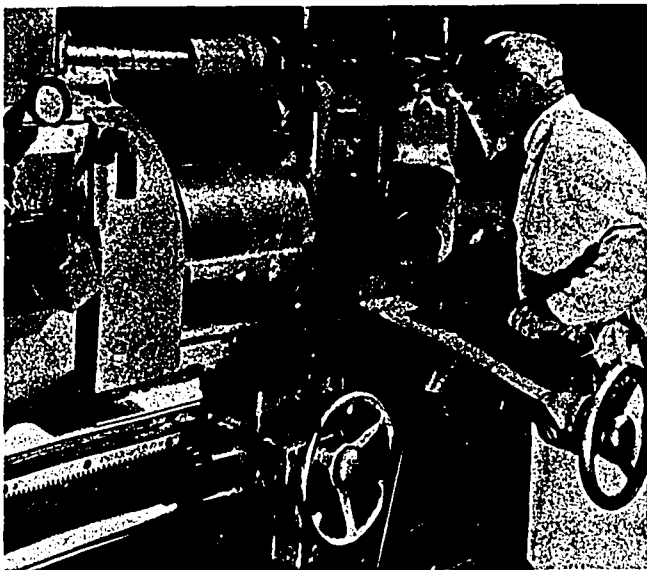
The worker at this machine is using a lathe to cut a round casting down to the right size by removing chips from the workpiece. The lathe is the most common machine that uses a single-edge cutting tool to remove stock from a workpiece in the form of chips.
